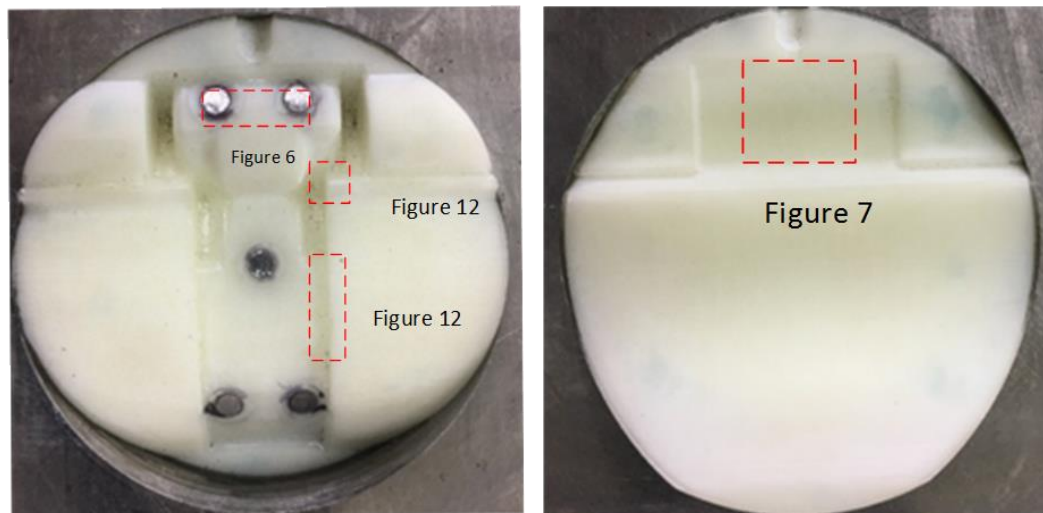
(a) Core insert for case study-3 fitted inside a master unit die. (b) Cavity insert for case study-3 fitted inside a master unit die. Tool outer diameter is 55mm.
